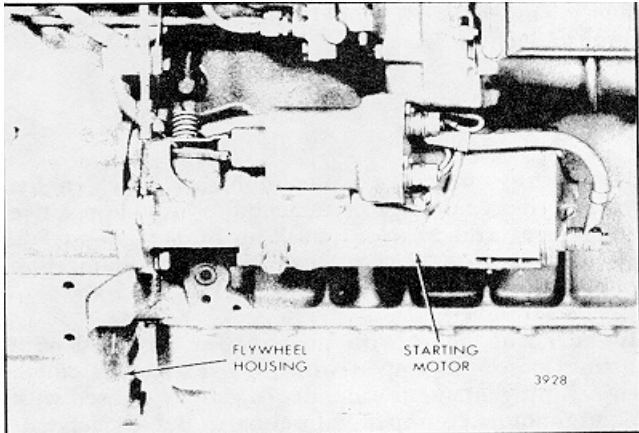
Dyer Drive Type Starting Motor Mounting (Former)
